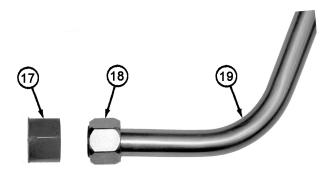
Oil Fill Tube Assembly. (X200-4A Only)
